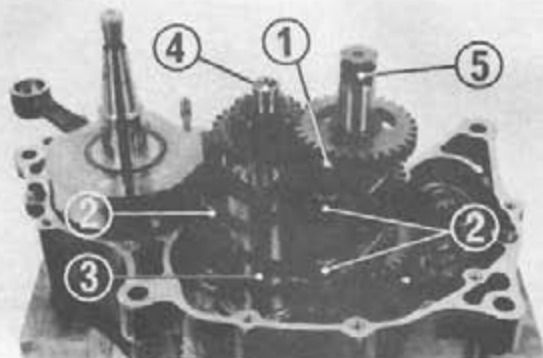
(1) Shift fork shaft (4) Main shaft
